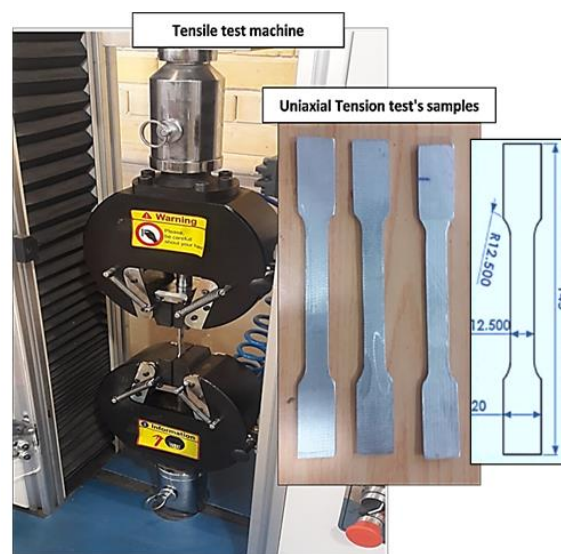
Tensile test specimen and tensile testing machine (dimensions in mm).
